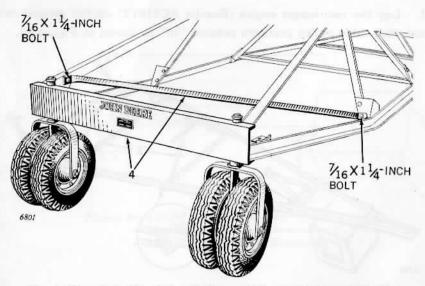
Rear Wheel Assembly and Diagonal Brace Installed
